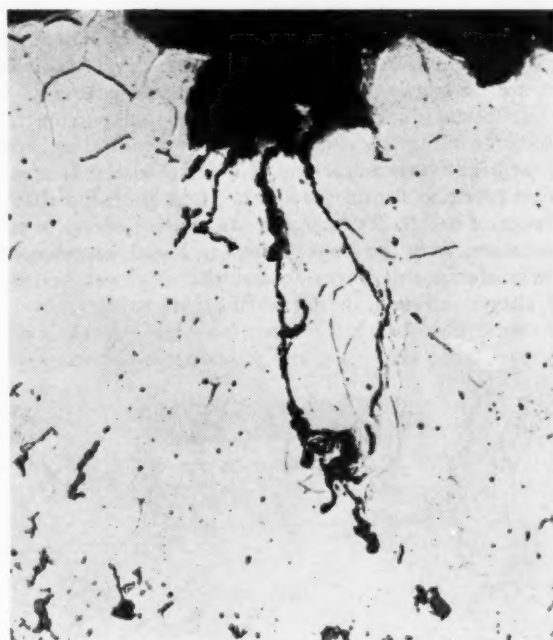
"FOLDS" AT INNER SURFACE OF SEAMLESS-STEEL BOILER TUBE; $\times 500$
